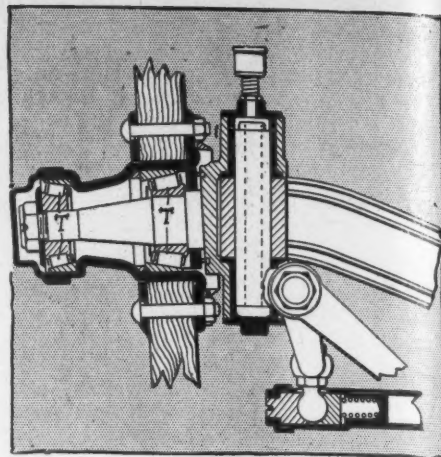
TIMKEN BEARINGS ON FRONT WHEELS
